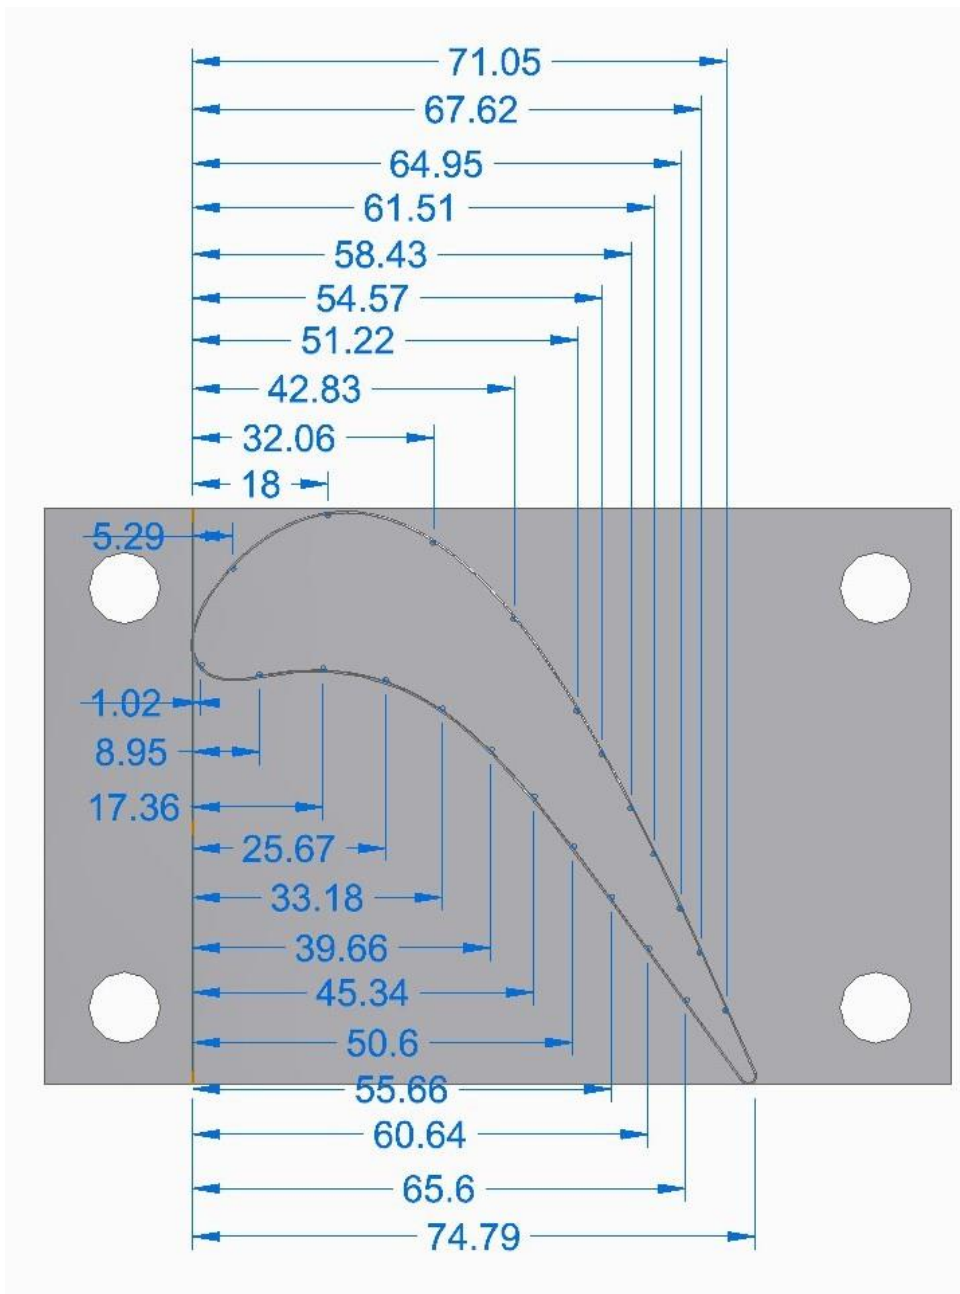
Central turbine blade pressure tap dimensional x locations. Dimensions given in millimeters.
